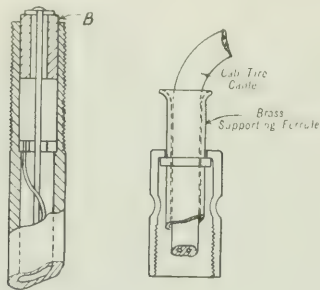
FIBRE INSULATING BUSH. FIG. 2.—CABLE-SUPPORTING FERRULE.
